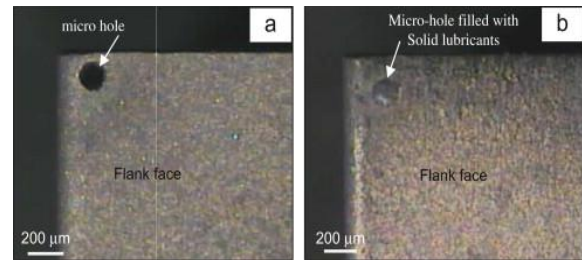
Self-lubricated cutting tool a) without filling the hole with lubricant and b) with the hole filled with lubricant [58].
